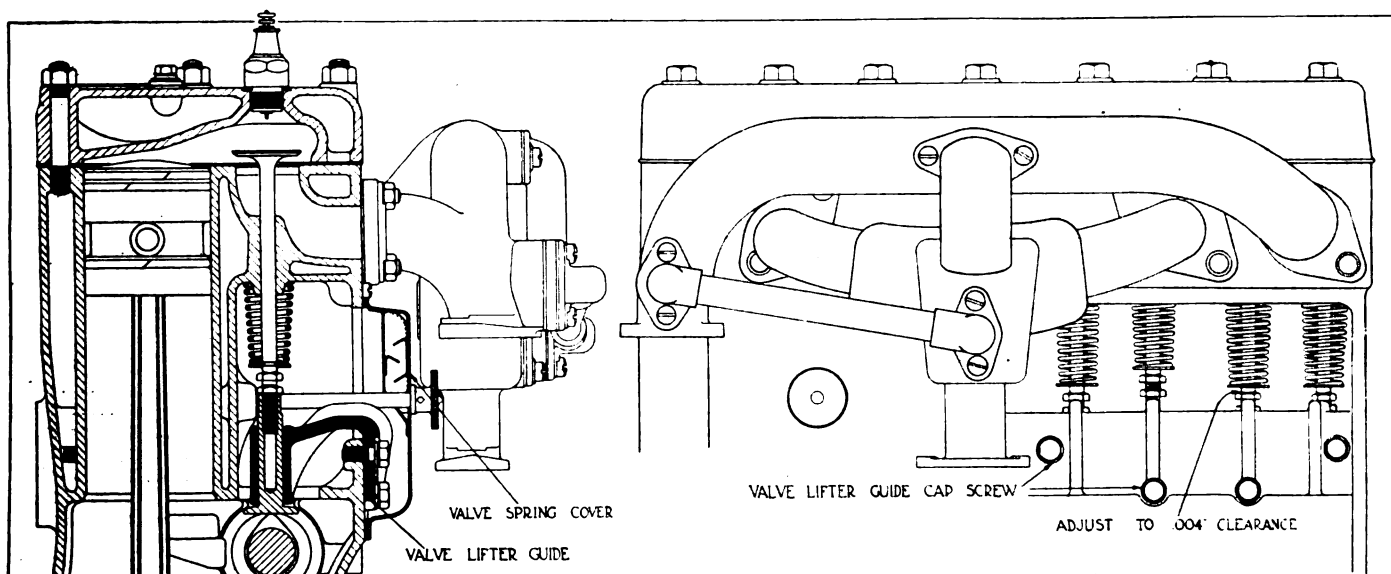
These drawings indicate the case with which the valve tappet assembly may be removed
